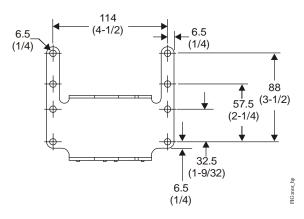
Hole Patterns in Mounting Brackets with Dimensions, mm (in.)
